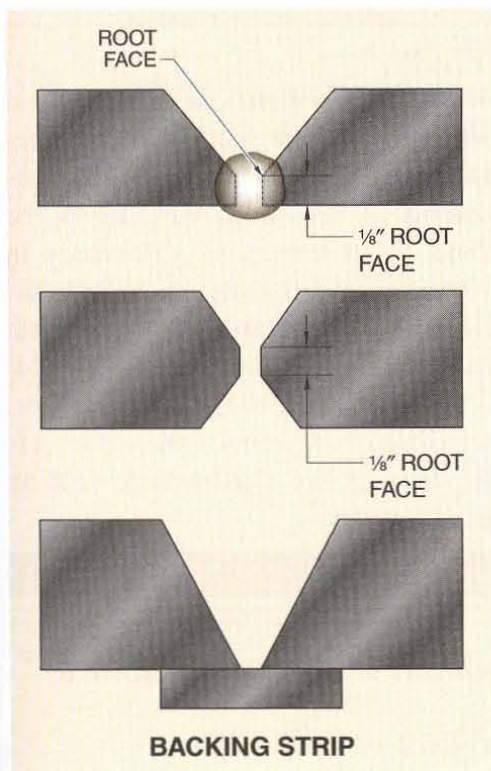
The proper root face must be provided for a quality weld.
